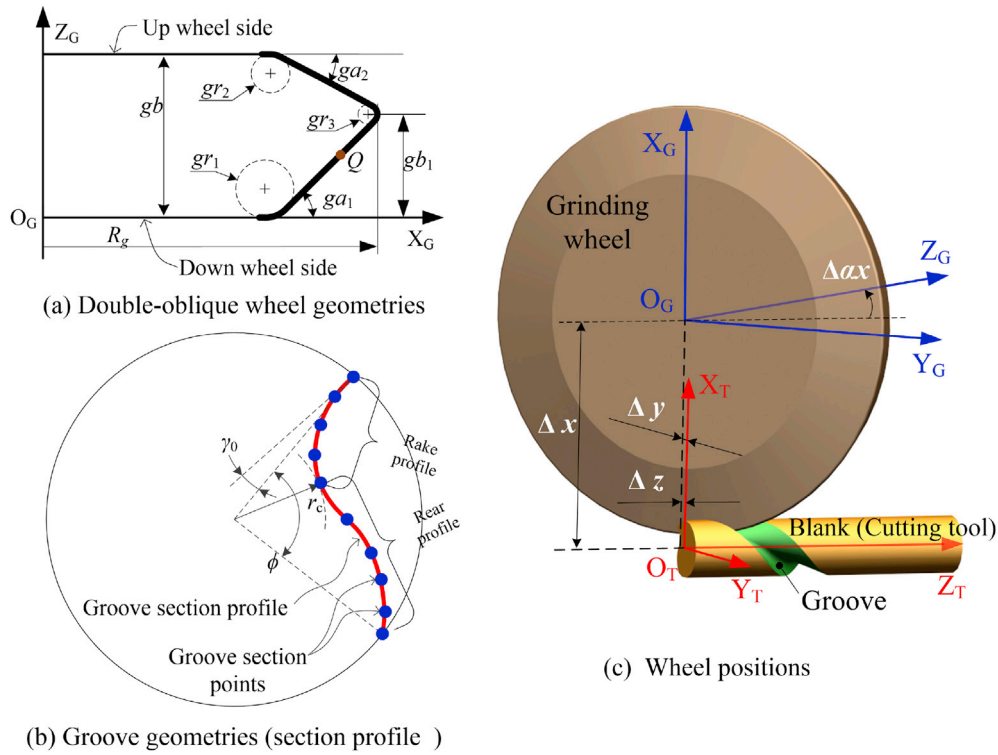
Basic parameters for cutting tool groove side manufacture. (Three basic groove parameters: rake angle γ_0 ; core radius r_c ; and groove width ϕ).
